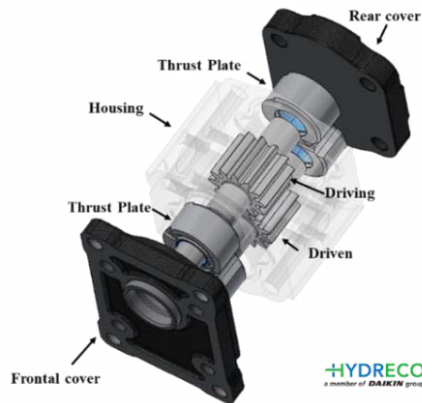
1– Exploded view of Hydreco HY2 pump (aluminium housing)
